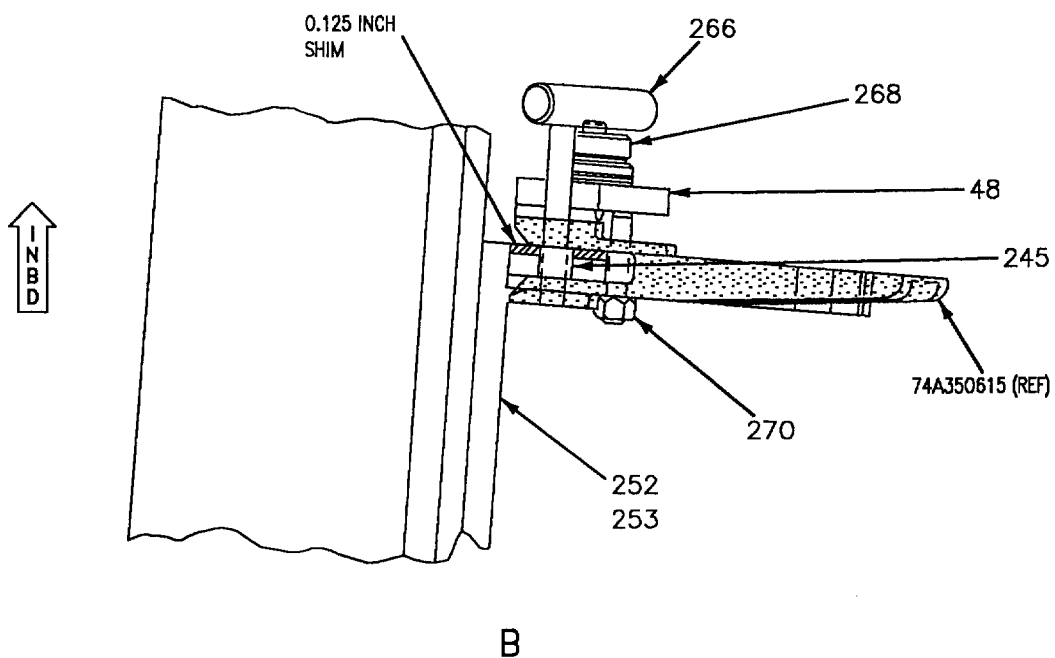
Inspection or Replacement - Hinge (Sheet 2)
